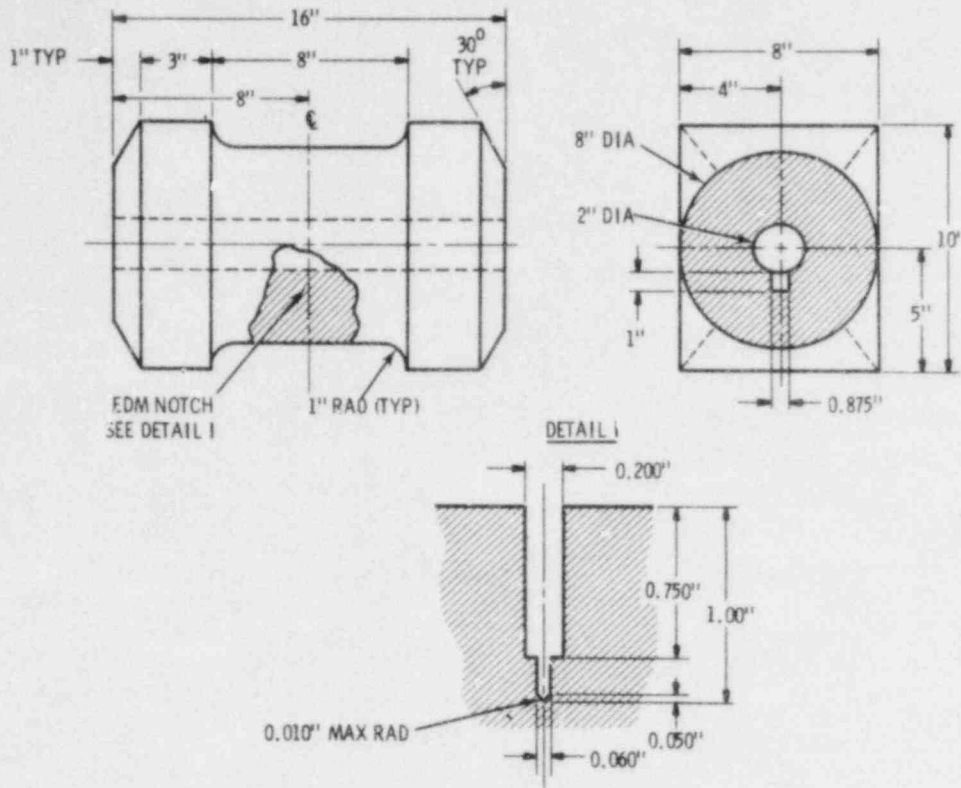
Heavy Section Cylindrical Bend Specimen and Electro-Discharge Machined Notch Dimensions
